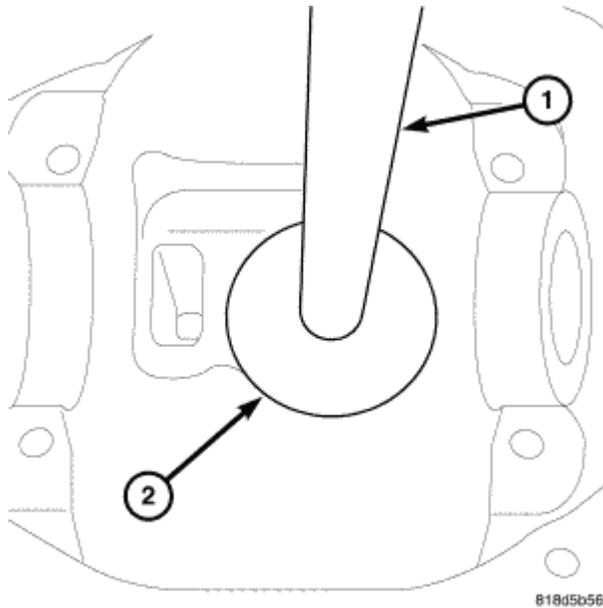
Installing Rear Bearing Cup With Installer C-4308 And Handle C-4171
